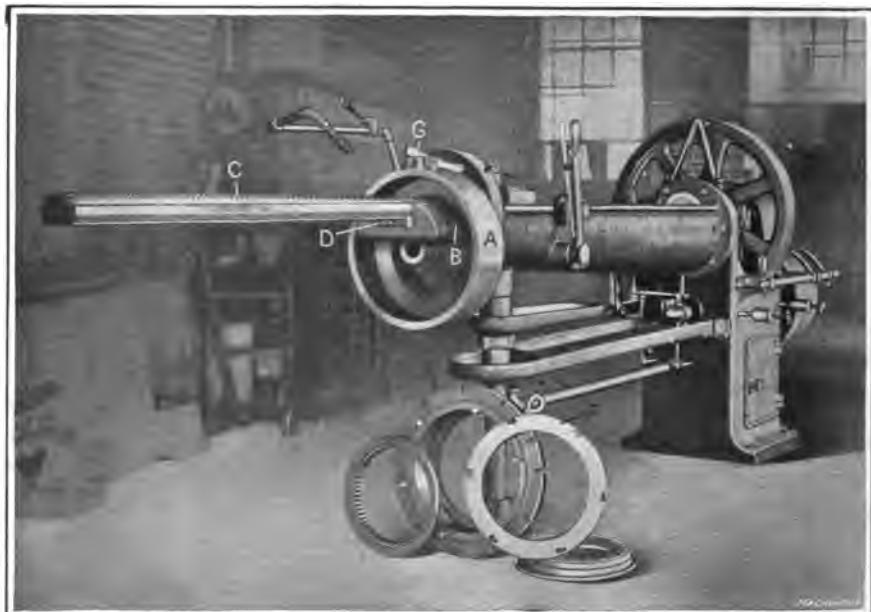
Machine shown in Fig. 51, with Work-holder and Two Finished Gears removed
